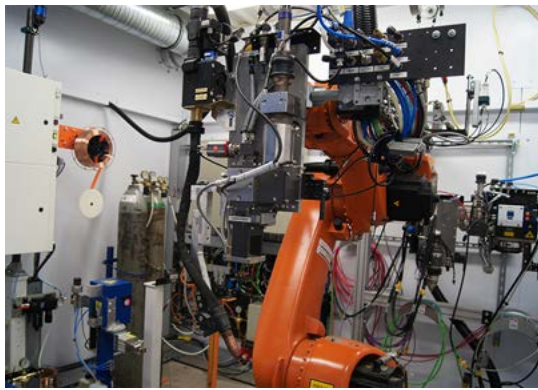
Robotic station with a specialist hybrid welding head at Instytut Spawalnictwa: Yb:YAG Trumf TruDisk 12002 laser (12 kW); KUKA-manufactured KS HybridTec head; EWM-manufactured Tetrax T270 power source
